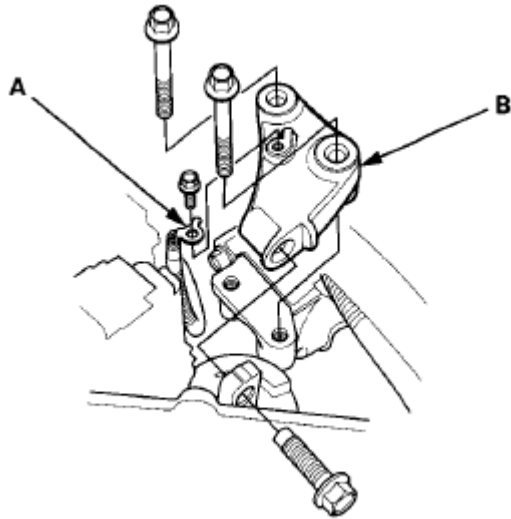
Identifying Ground Cable And Engine Mount Bracket
